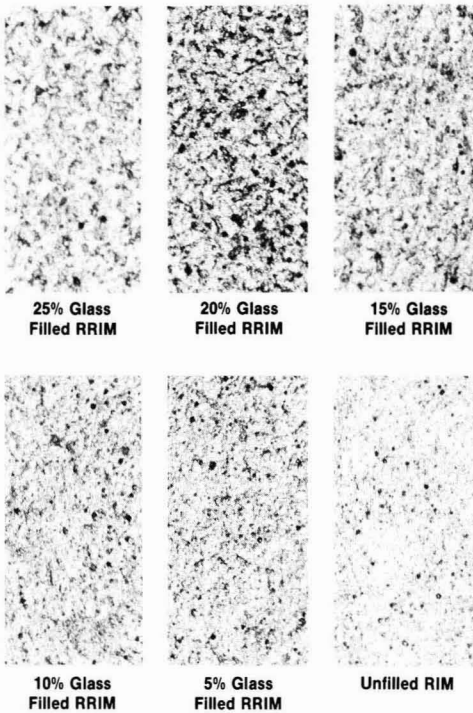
Photographs of primed surfaces of RRIM parts (23× magnification)
